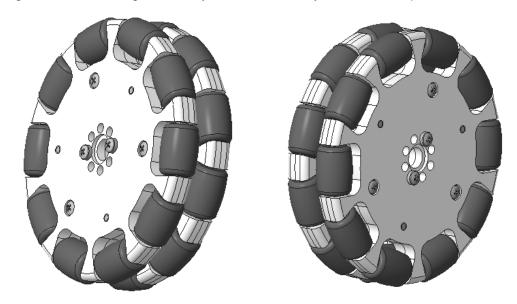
The above image shows only one wheel assembly. Perform this step on both assemblies
